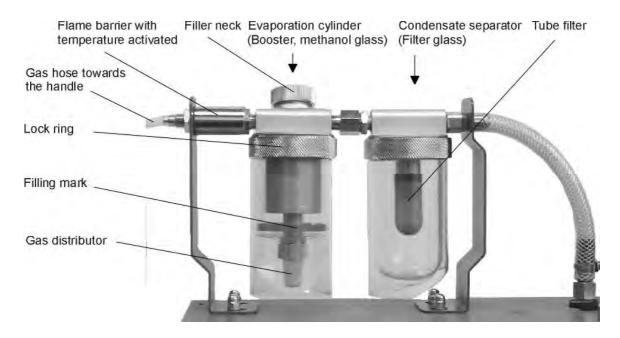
Top part with filter, evaporator and safety valve (flame barrier)
